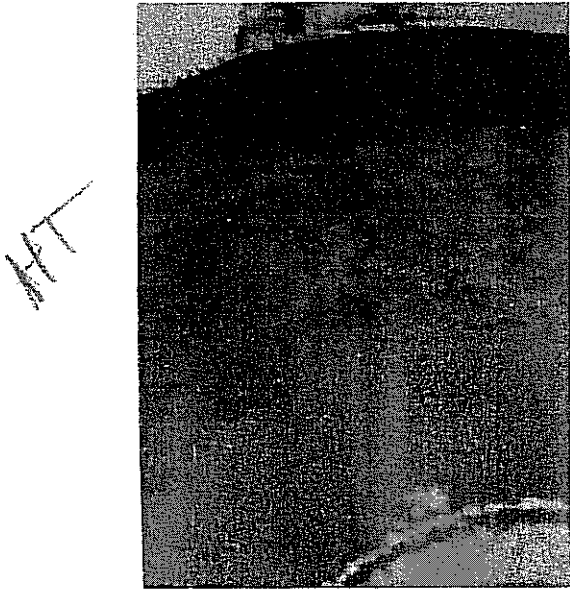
Hot Spot in the Center of a Machine Wide Reel – Marking the Event of a Center Burst
